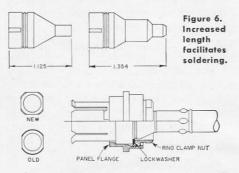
(Right) New ring clamp nut has additional flats. (Left) Positive locking of connector in "PB" series of panel flanges, with lockwasher.
